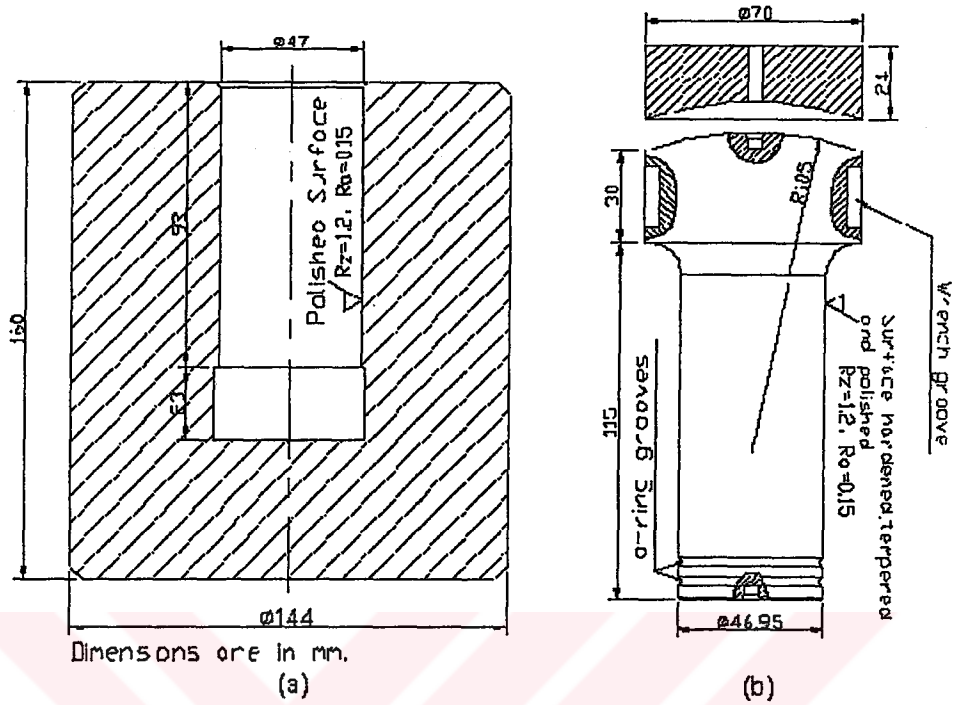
Wet Bag CIP unit used, (a) Pressure body, (b) Compression piston
